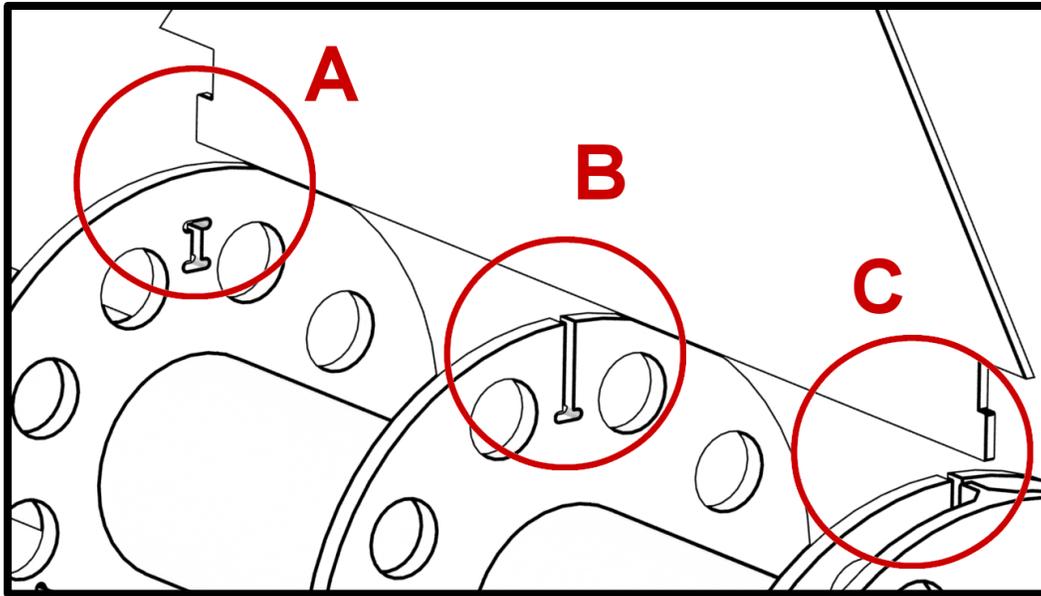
Highlighting the three connections between the fins, centering rings, and fin retainer.
